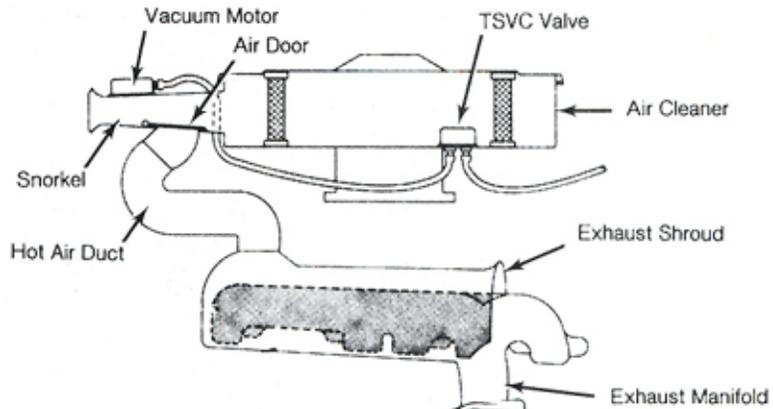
Typical Thermostatic Air-Cleaner System (Vacuum Control Shown; Thermostat Control is Similar)
